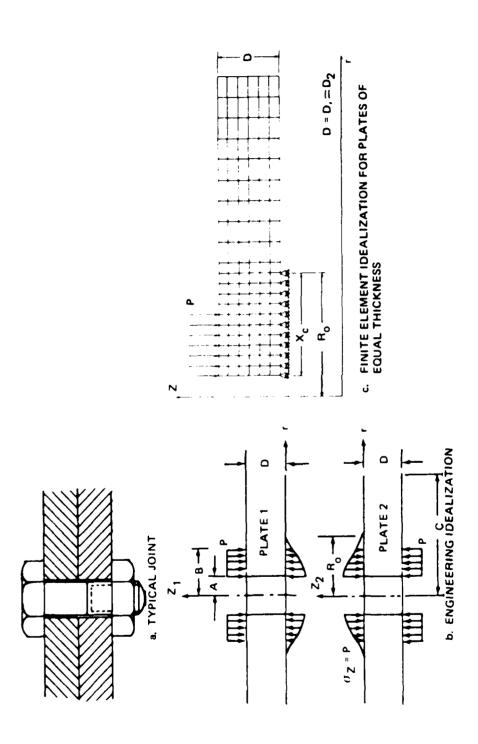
IDEALIZATION OF TIGHTLY BOLTED JOINT TO DETERMINE CONTACT PRESSURE BETWEEN PLATES OF EQUAL THICKNESS (REF. 12)
